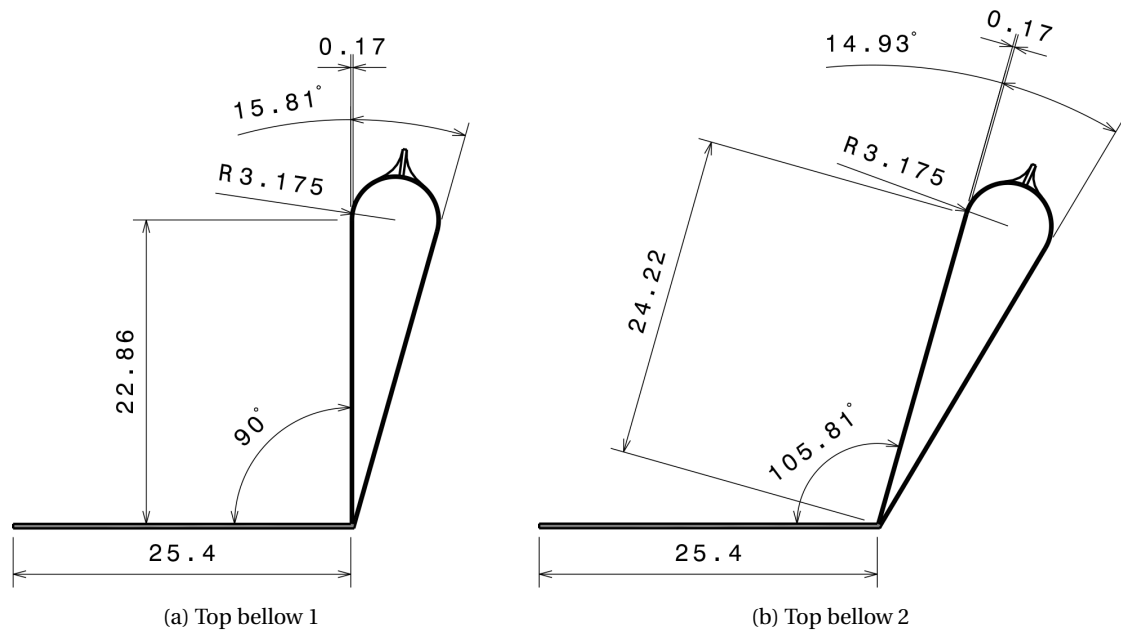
Cross-sectional view of the preliminary design of the top bellows with dimensions in [mm] and [deg]
